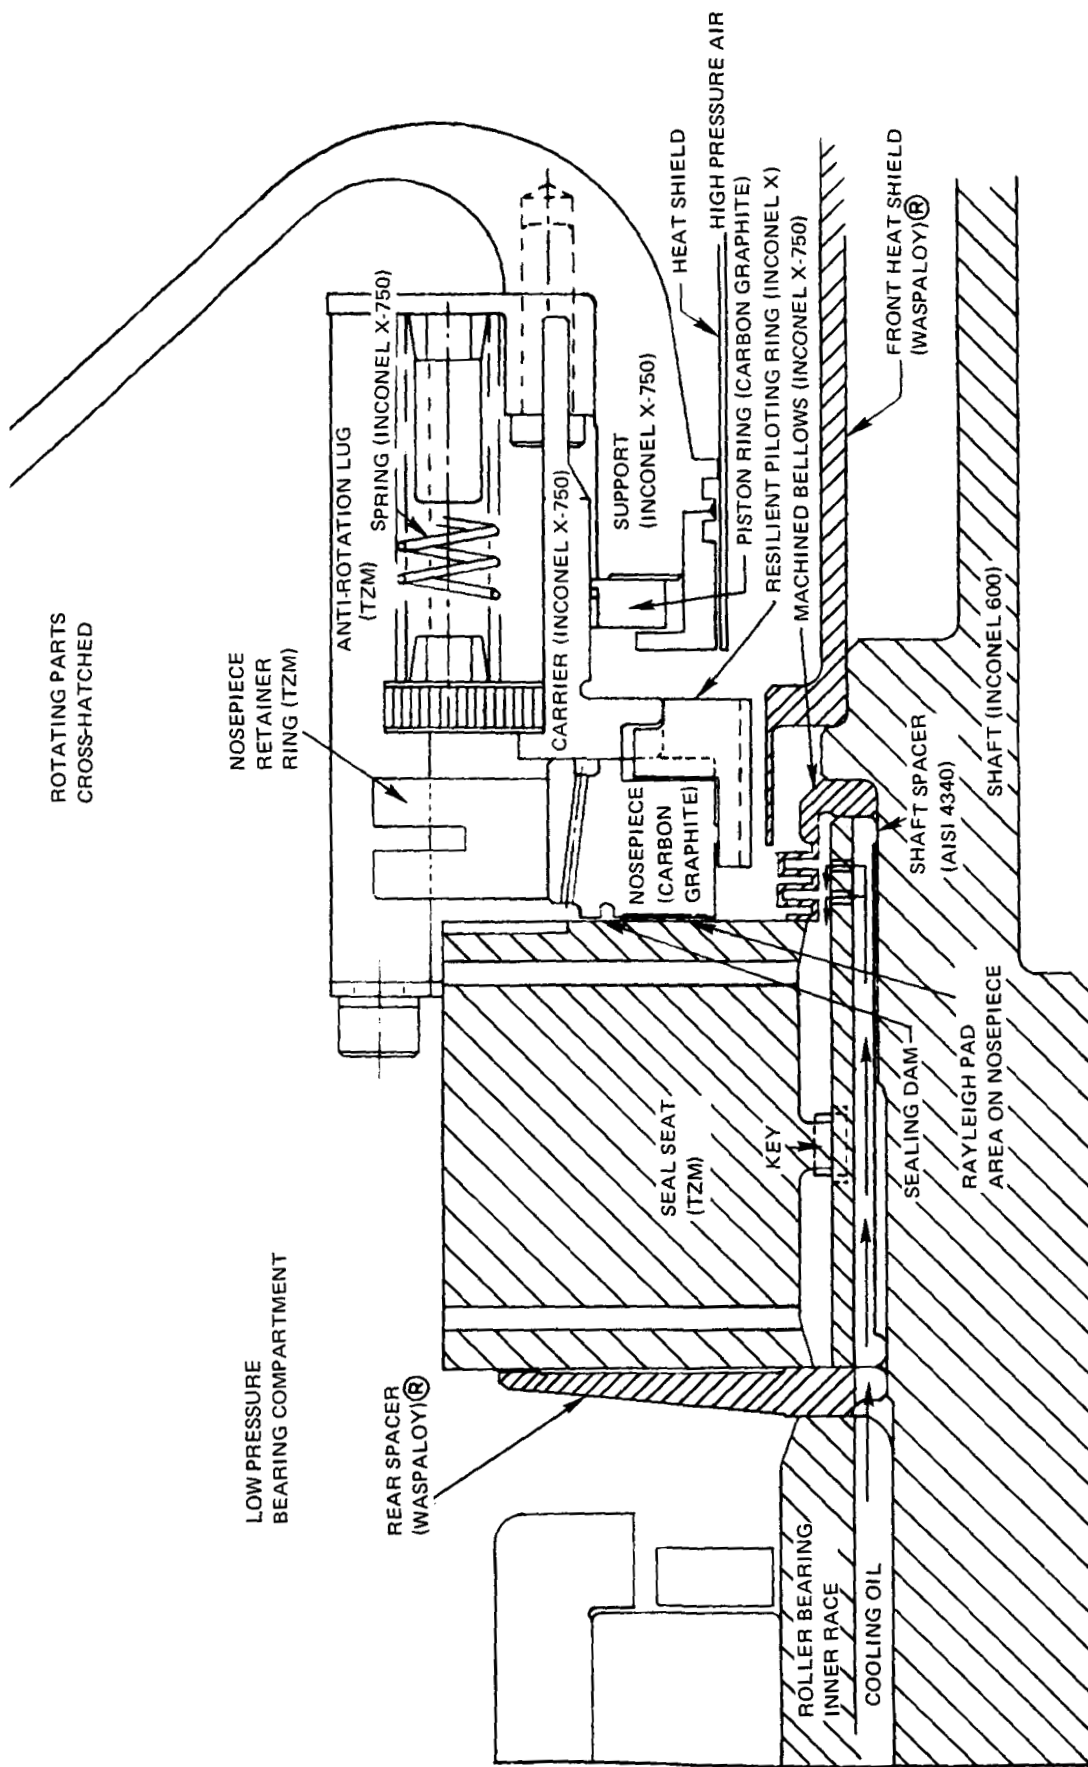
Final Hub and Seal Assembly Configuration With Large Diameter Wide Seal Seat Used During Elevated Temperature Testing and During Elevated Temperature Endurance Testing
